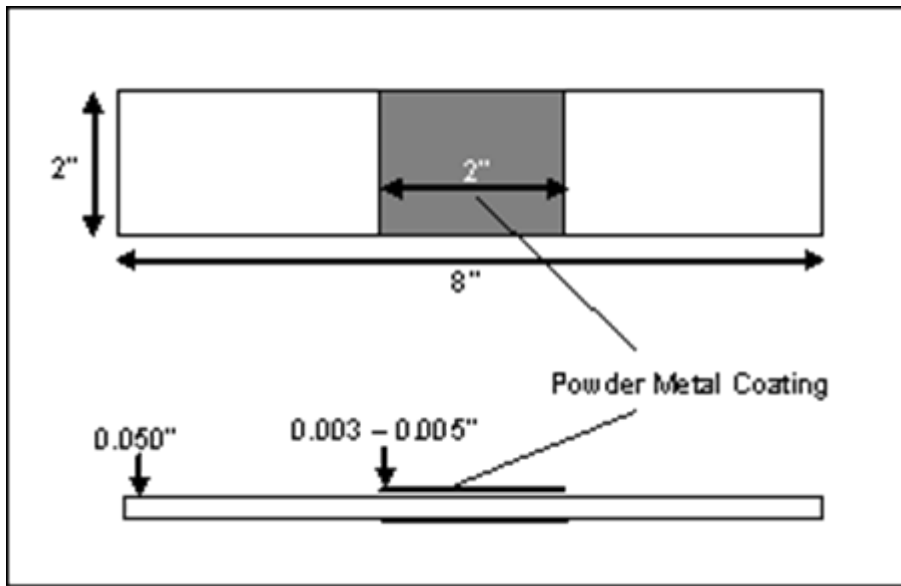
Coated area of the test specimen and coupon dimensions with coating location and thickness specifics.
